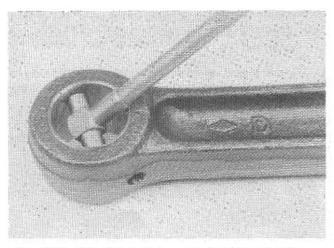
Checking Piston Pin Rod Bearing Bore
